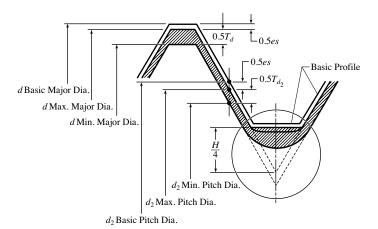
External Thread - Limiting M Profile. Tolerance Position g
